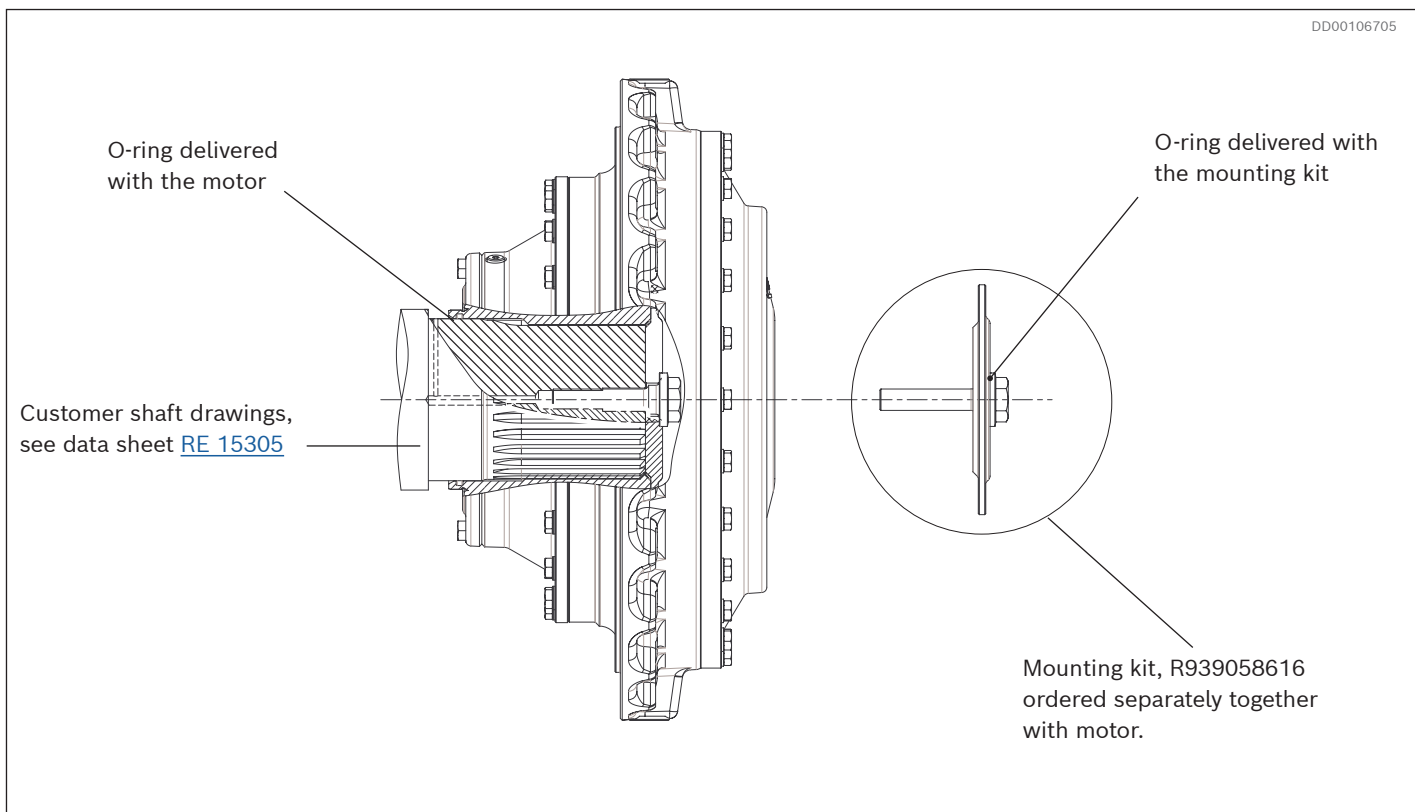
Example torque arm mounted MDA 14 and MDA 21 on customer shaft
